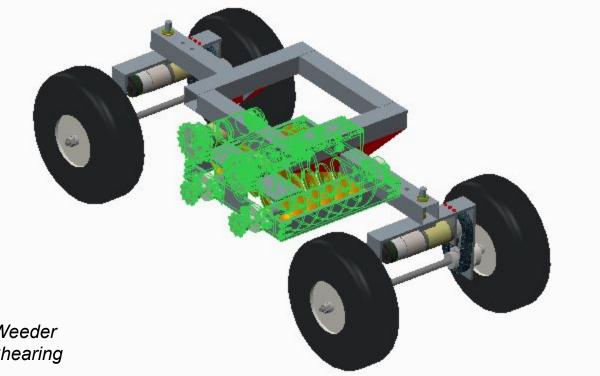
Robo-Weeder with Highlighted Shearing Mechanism.
